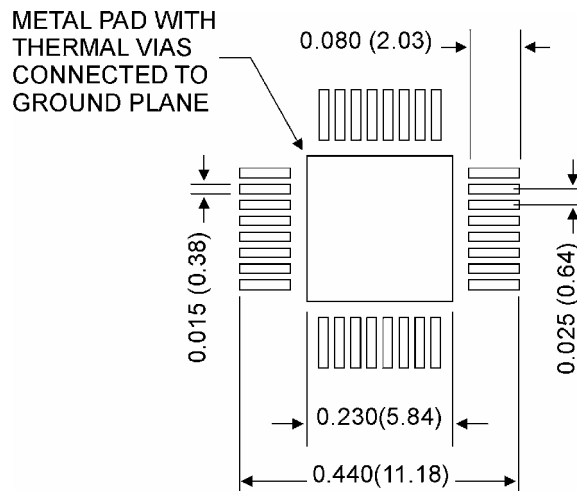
RDA012-QP footprint, dimensions shown in inches (mm).
